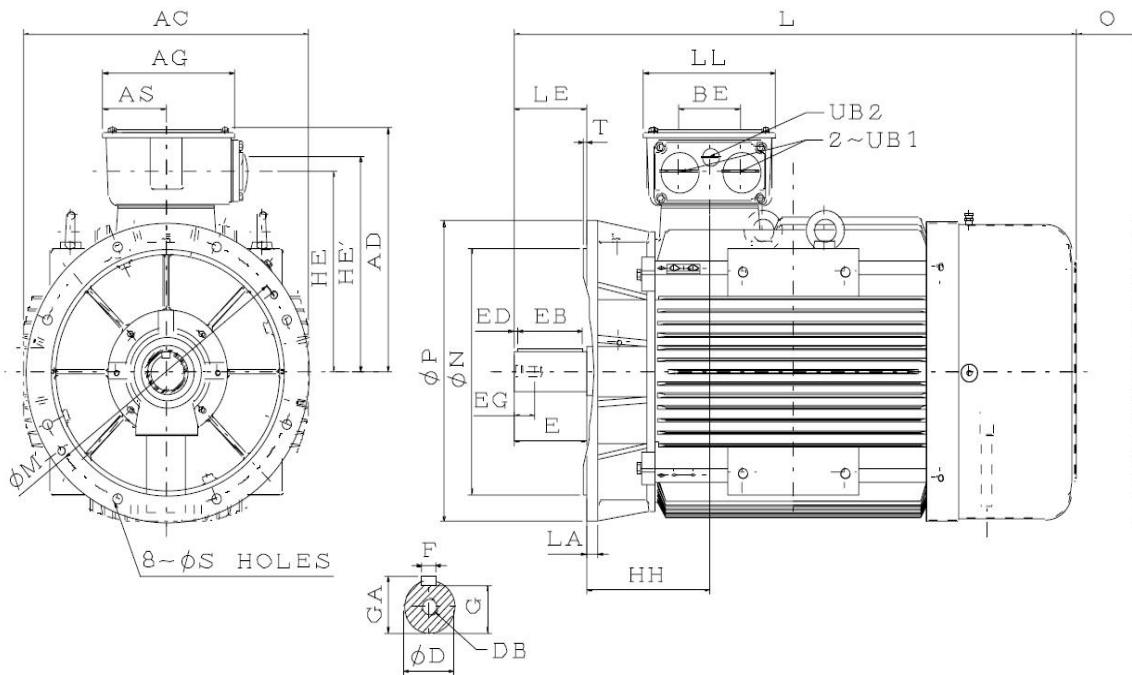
Outline drawing of cast iron design, flange version, mounting B5, frame size 280
